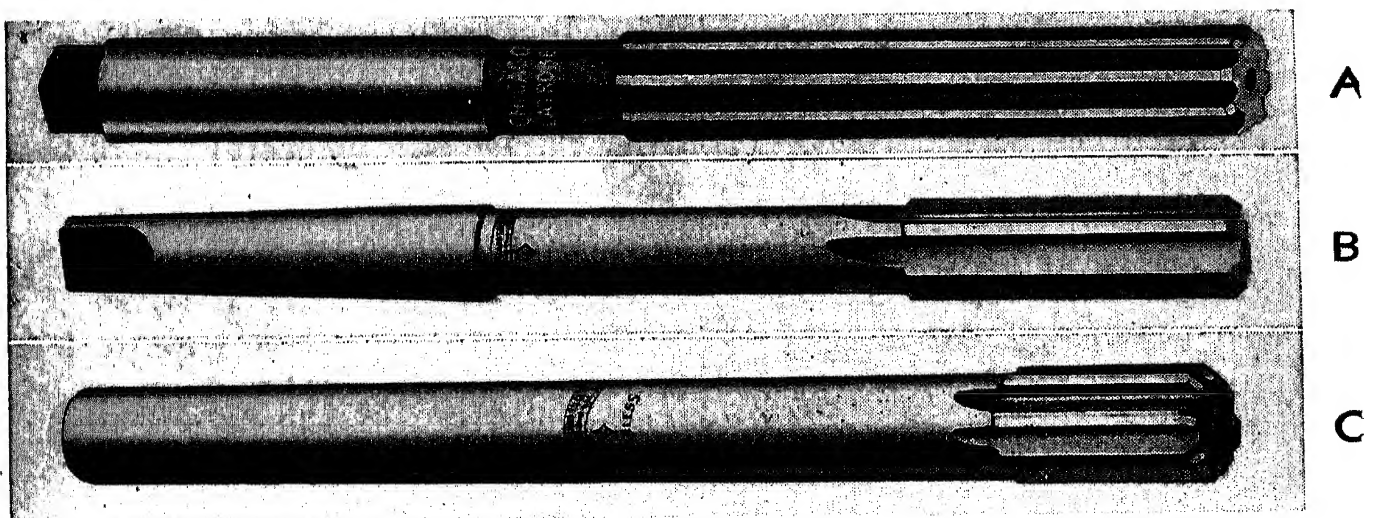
Typical reamers. A. A straight flute solid hand reamer. (Courtesy Chicago-Latrobe Twist Drill Works.) B. A rose chucking reamer with tapered shank. (Courtesy Cleveland Twist Drill Co.) C. A straight flute expansion chucking reamer with tipped blades. (Courtesy Cleveland Twist Drill Co.)
